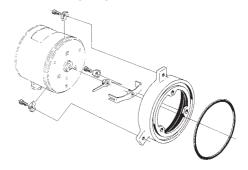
Accessory kit for pressure gauge mounting (see "Feature 12.")
